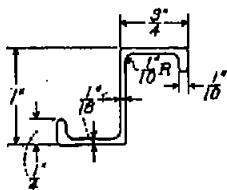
Construction of sheet-stringer panels and nominal dimensions of stringer. Stringers fastened to sheet by 1/8-inch brazier-head rivets for panels 1 to 9; 1/8-inch round-head rivets for panels 10 to 12; and spot-welds with 1/4-inch indentation diameter for panels 13 to 18.
